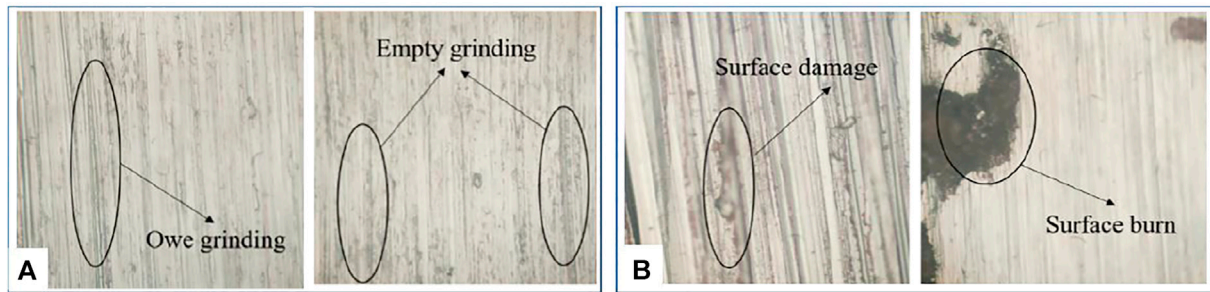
| Experimental equipment and testing equipment. (A) Machined surface with small grinding parameters. (B) Machined surface with grinding parameters.
